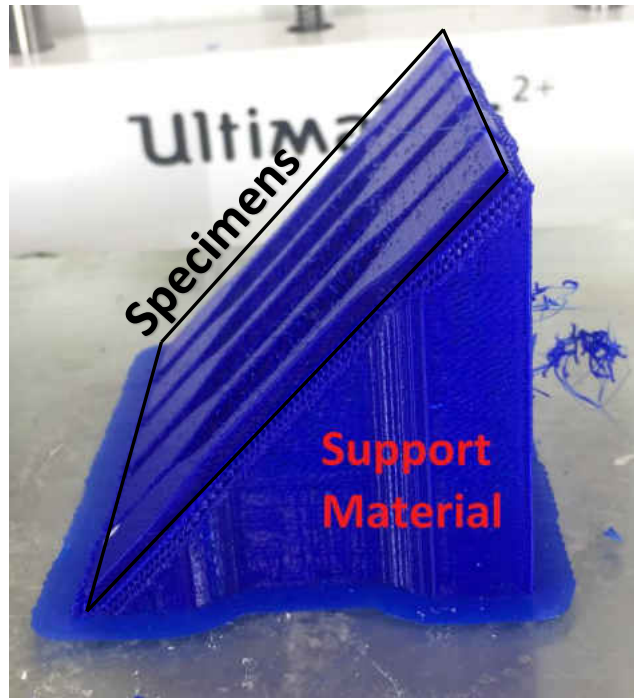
Printed Y-45 sample with specimens and support material labeled
